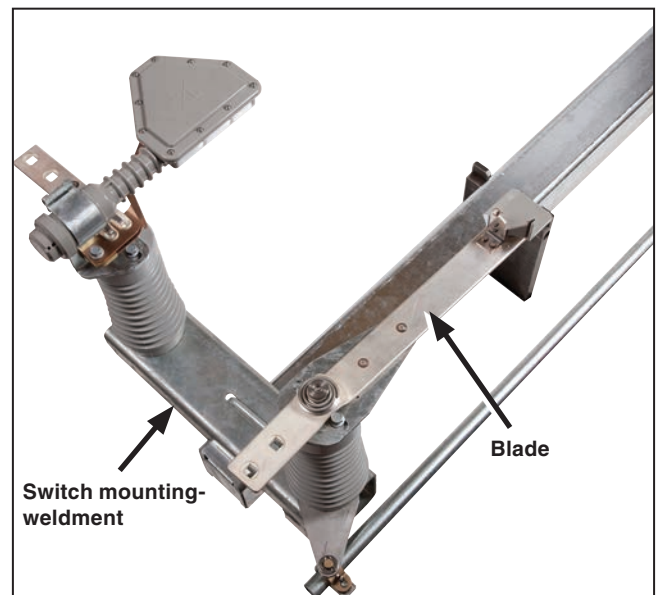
Blade at 90 degrees from switch mounting-weldment position.
